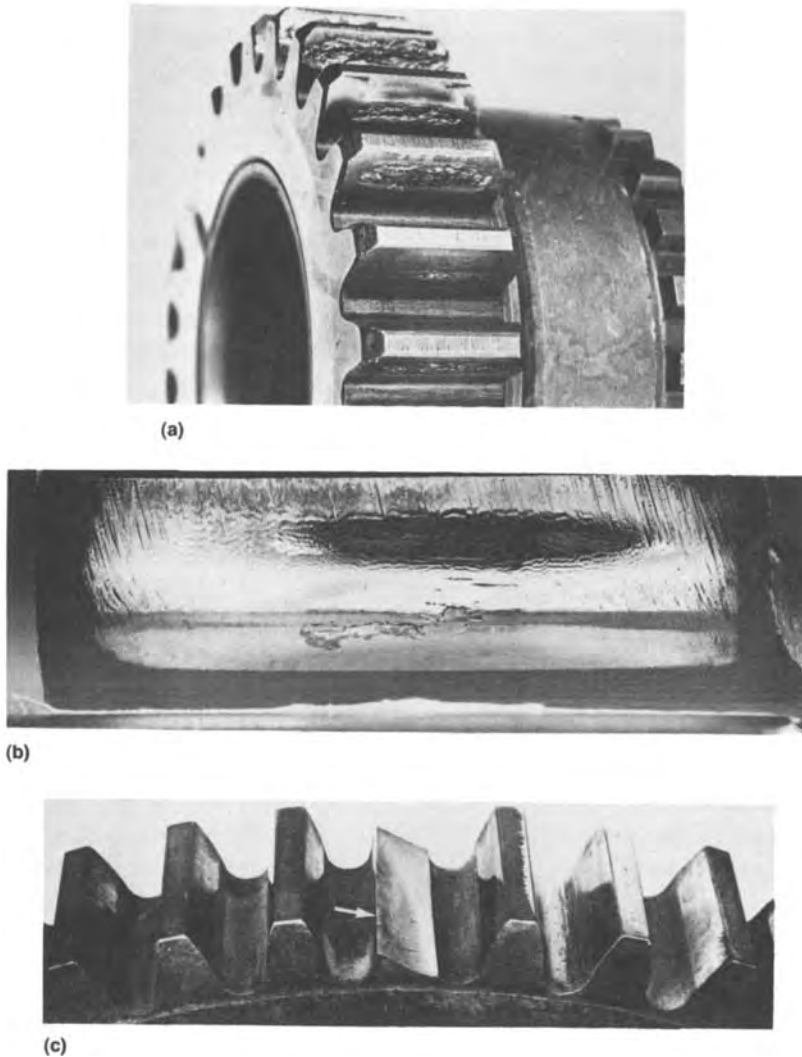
Surface-origin pitting fatigue. (a) Typical surface deterioration due to pitting fatigue on gear teeth. In a standard gear system the pitch line is near the center of the height of the teeth. Pitting fatigue usually starts slightly below the pitch line, then rapidly spreads to adjacent areas, causing complete surface deterioration. This heavily loaded gear was made of case-hardened alloy steel, with a surface hardness near 60 HRC. (b) Heavily loaded final drive pinion with surface pitting near the pitch line, which was low on this gear tooth. The rippling shown is plastic deformation caused by the sliding action under heavy contact pressure and is a warning that the metal is close to failure. The parallel diagonal marks are tool marks resulting from the shaving operation and are not involved with the service in any way. (c) Fracture of gear tooth at pitch line. Another consequence of pitting fatigue on the active profile of gear teeth is the fact that the pit itself is a stress concentration that can cause abnormal bending fatigue fracture of gear teeth, which are really carefully shaped cantilever beams. This gear tooth pitted just below the pitch line, then fractured as a result of bending fatigue. The normal location for bending fatigue fractures of gear teeth is at the root fillet, not midway up the tooth, as in this example. This gear was made from a medium-carbon steel, induction hardened to about 55 HRC.
